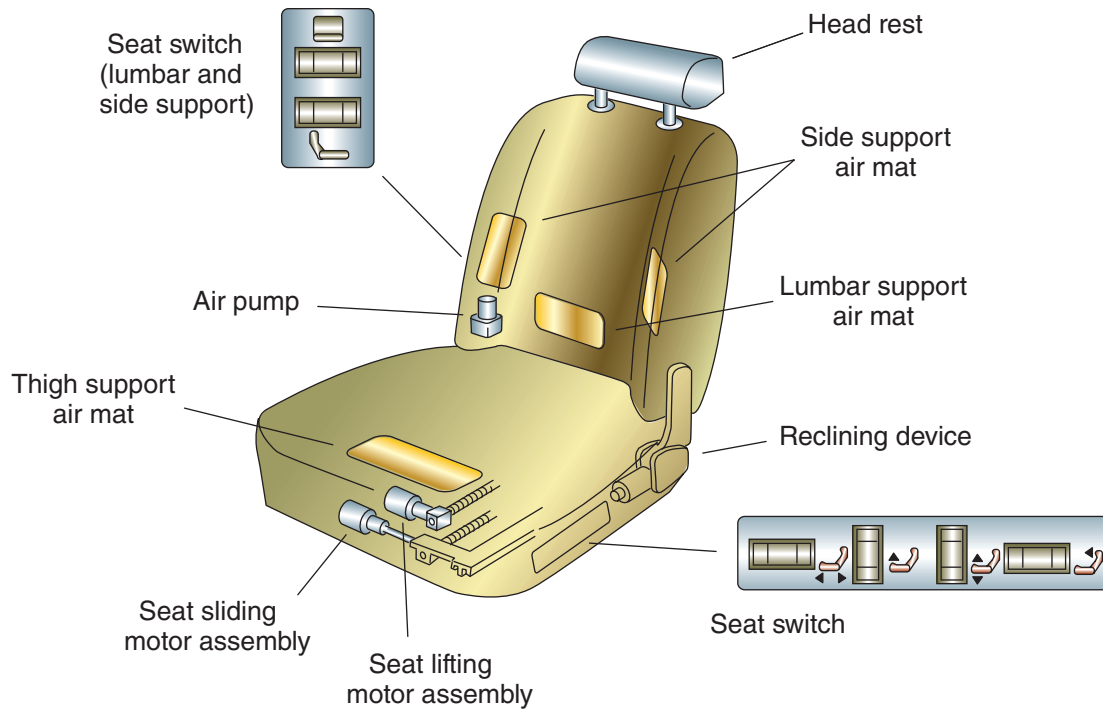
Seat adjustments can improve driver and passenger comfort.
